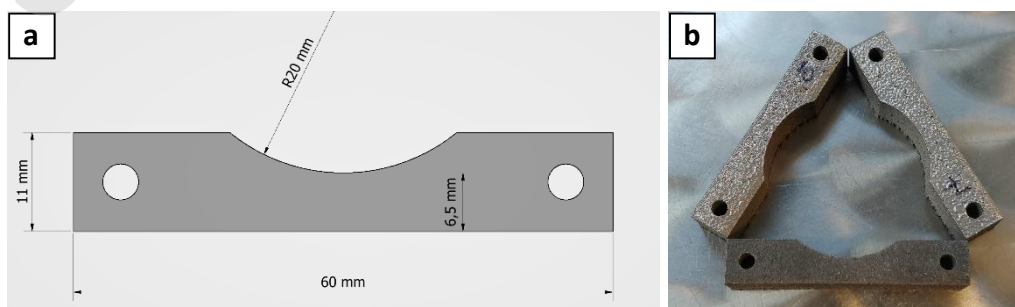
Geometry of the three-point bending fatigue samples printed via L-PBF using AlSi7Mg powders: (a) sample geometry; (b) printed fatigue samples with different surface conditions.
